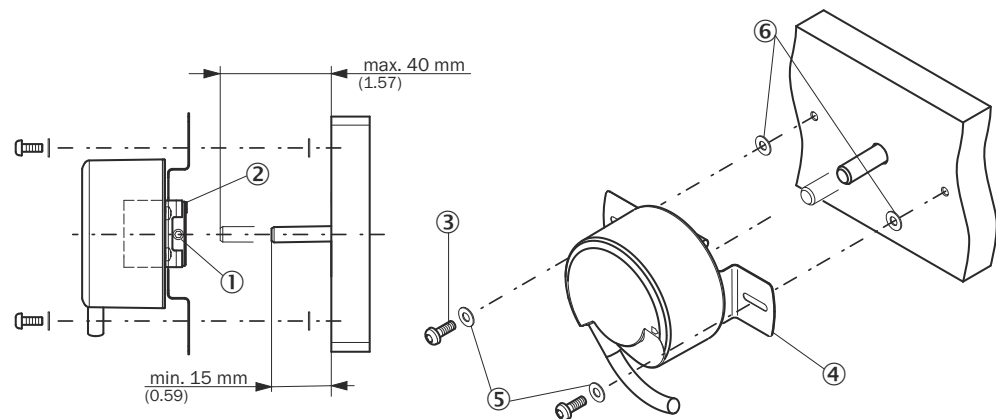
Mounting blind hollow shaft with stator coupling O, B, D, E, G
